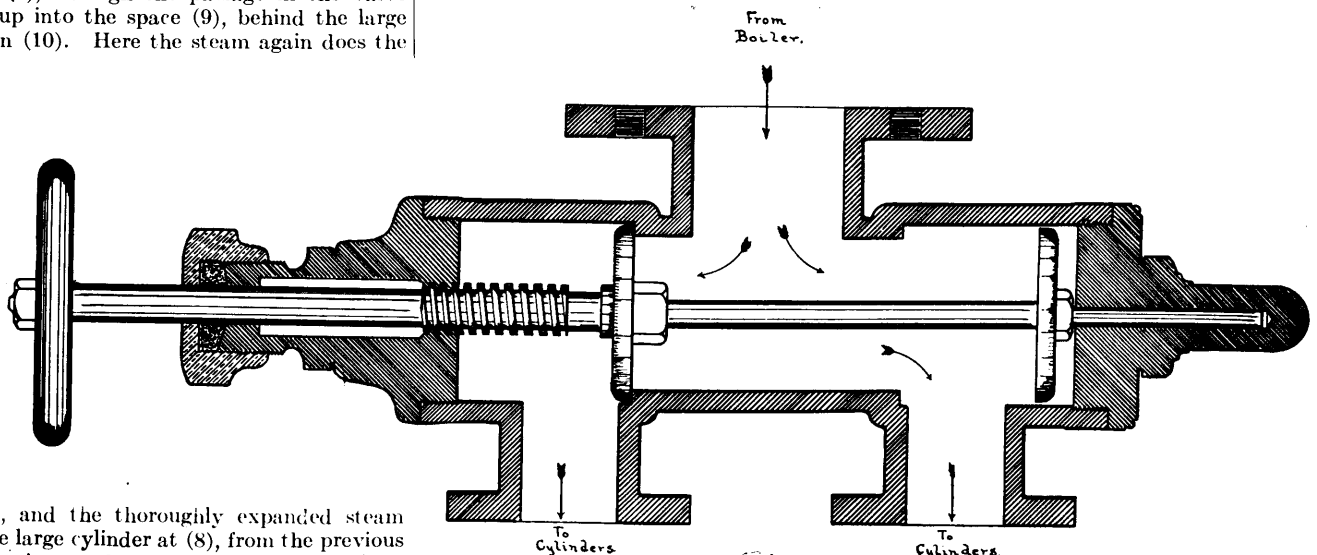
SECTIONAL VIEW OF CONTROL VALVE, HARDILL ENGINE
